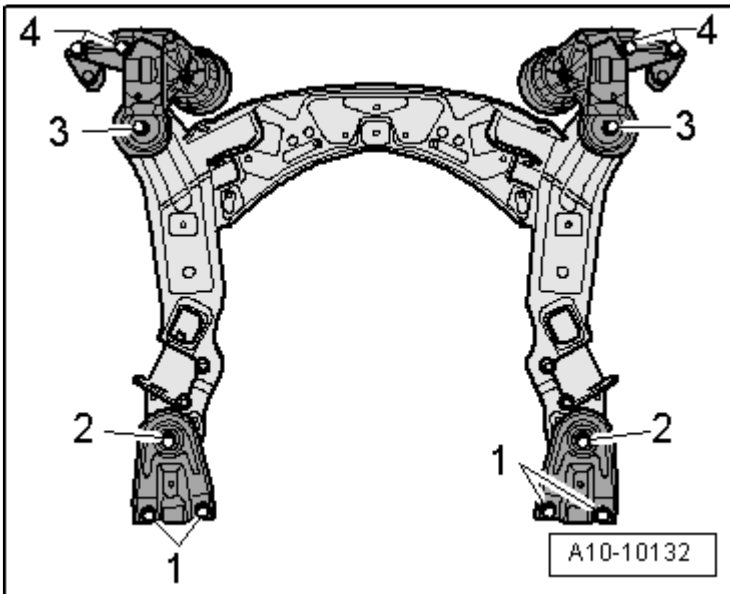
Engine Mount Plate Bolts Removal/Installing Sequence
